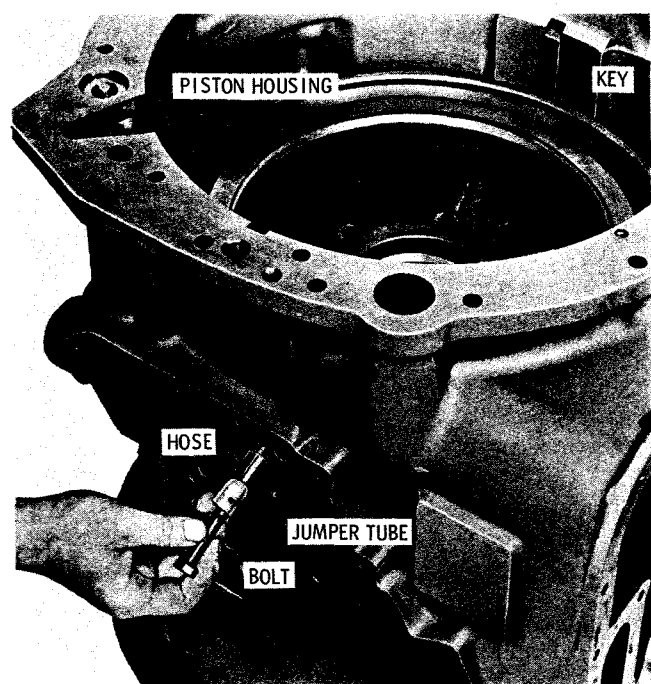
Removing high-splitter clutch jumper tube and hose
